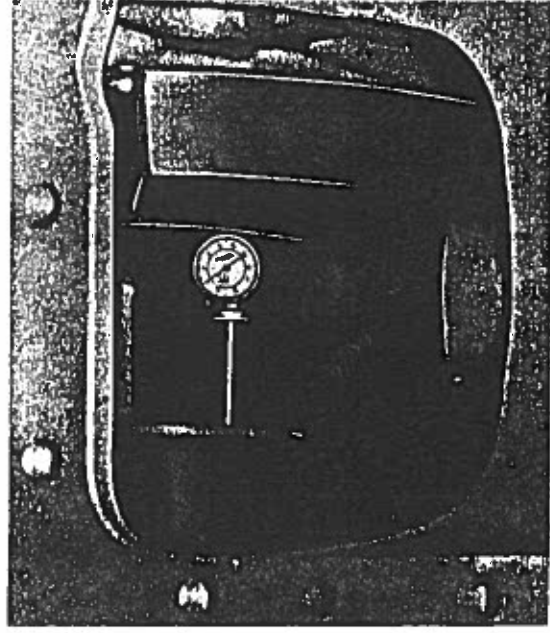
CHECKING CRANKSHAFT DEFLECTION
